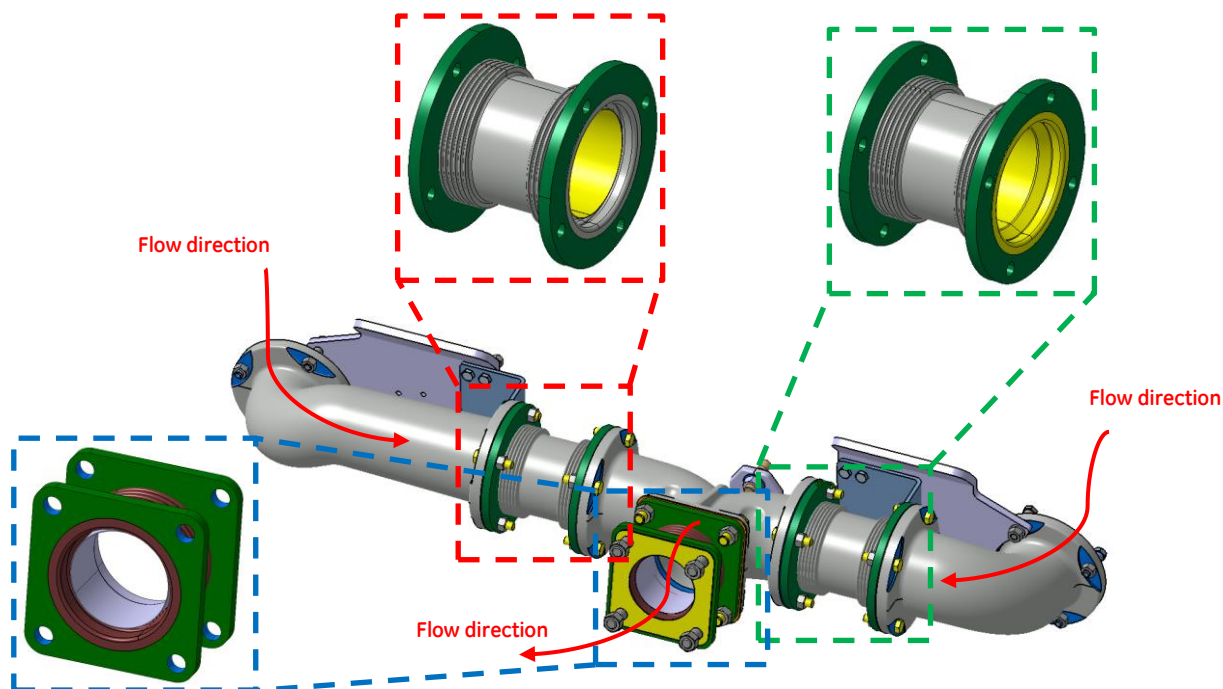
Exhaust-gas manifold to be fitted, including turbocharger mounting
